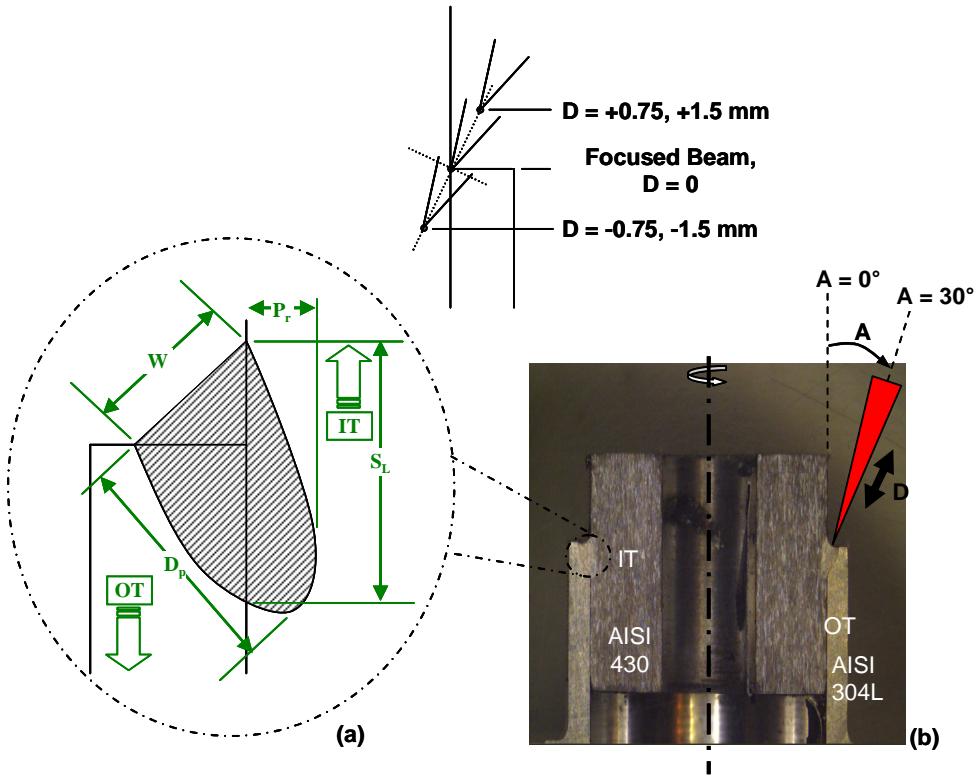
Diagrams showing (a) bead characteristics of a welded fillet joint (W : Weld Width; S_L : Weld Resistance Length; D_p : Weld Penetration Depth; and P_r : Weld Radial Penetration), and (b) adopted laser-welding procedure
